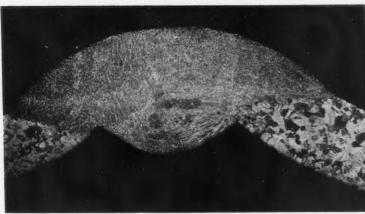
shows a rewelded cross-section of a weld made using a Group 2 flux. There is none of the flux eutectic visible in this weld. However, repair welding caused cracking. Examination at higher magnification (fig. 12) revealed that a phase had separated from the weld metal, and that this phase was also apparent in the boundaries, and in the body of the grains of the
